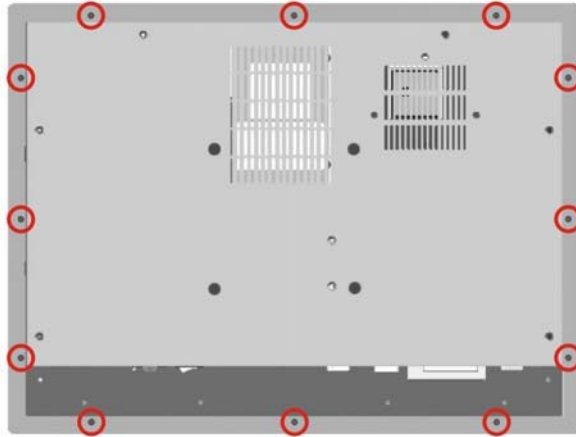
Frame Rear View (12 panel mount retention screw holes)
